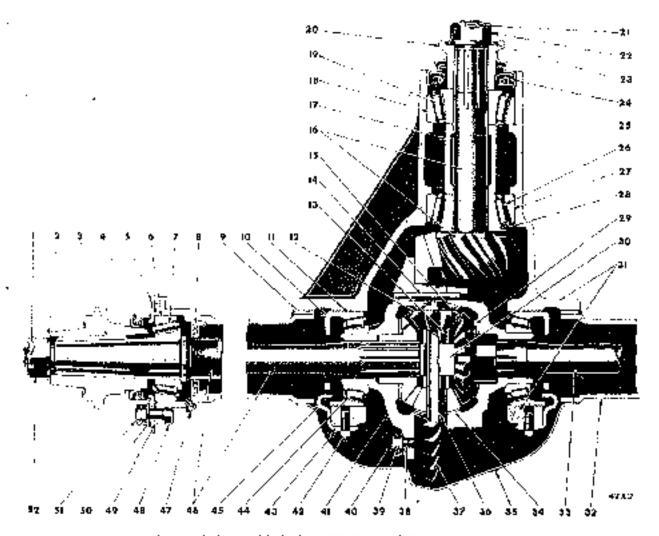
Rear Axle (Assembled View) (1942 Model, Typical of 1936-41 Models)
